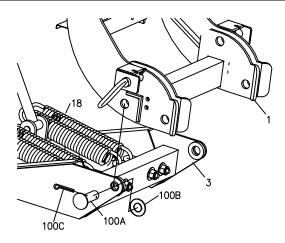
Attaching Coupler Assembly (1) with Push Frame (3).
